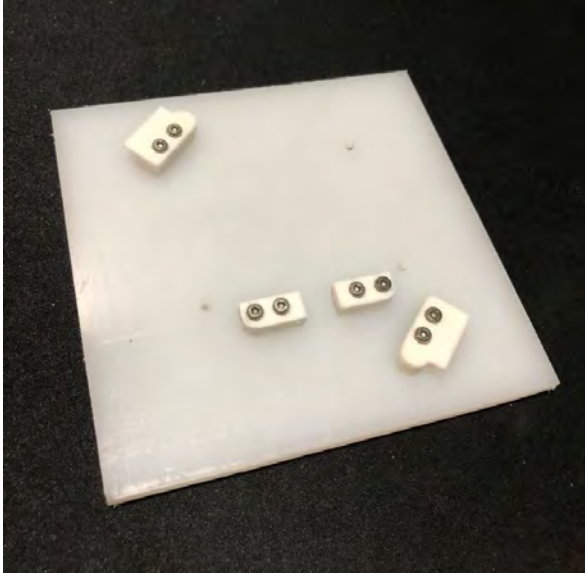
Antenna holders were attached on the mock-up board using screws based on the antenna board design.
